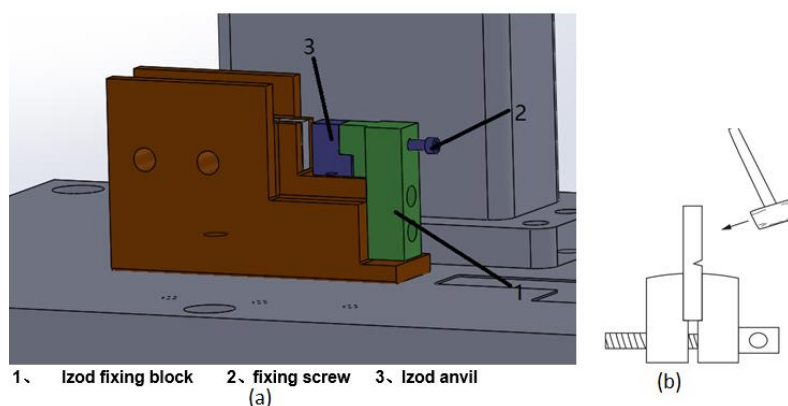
(a) major parts of Izod impact testing anvil, (b) schematic of Izod impact testing
